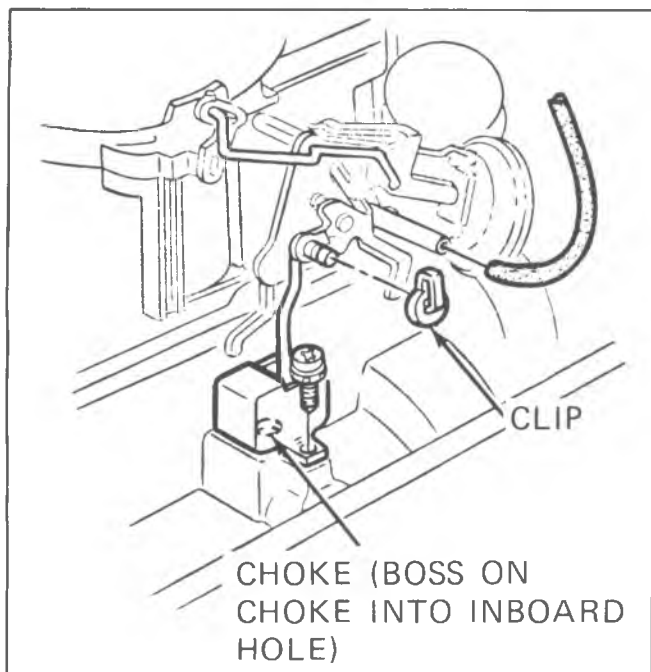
Q--Model 4MV Quadrajets Carburetor Choke
